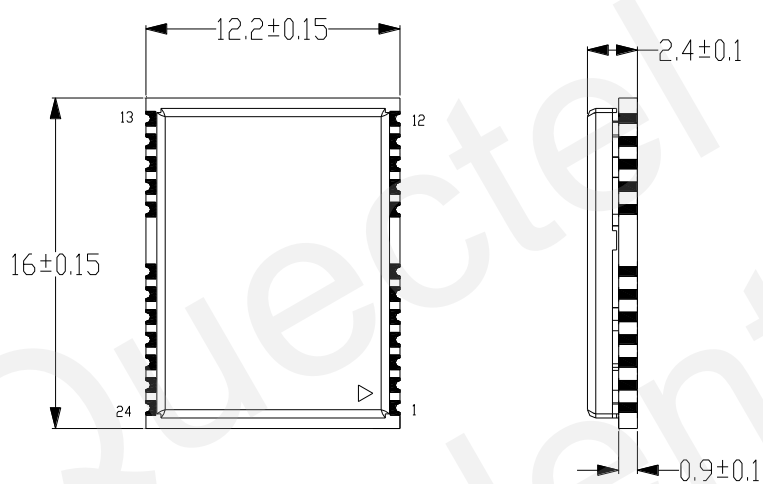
L20 Top View and Side Dimensions (Unit: mm)
